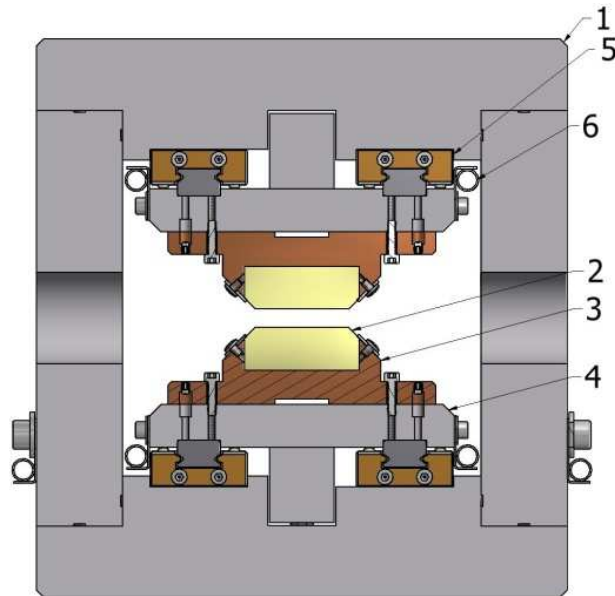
CHESS Compact Undulator cross-section. (1) – thick aluminum plates comprising the undulator frame; (2) – permanent magnet blocks soldered to copper holders (3); (4) – base plates holding PM block/holder assemblies; (5) – miniature rails; (6) – cooling lines. Outer frame dimensions are 152mm x 146mm. Gap between magnets is 5mm.
